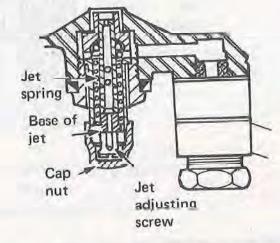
Cross-section of the thermostatic carburettor jet (Sec 3)
